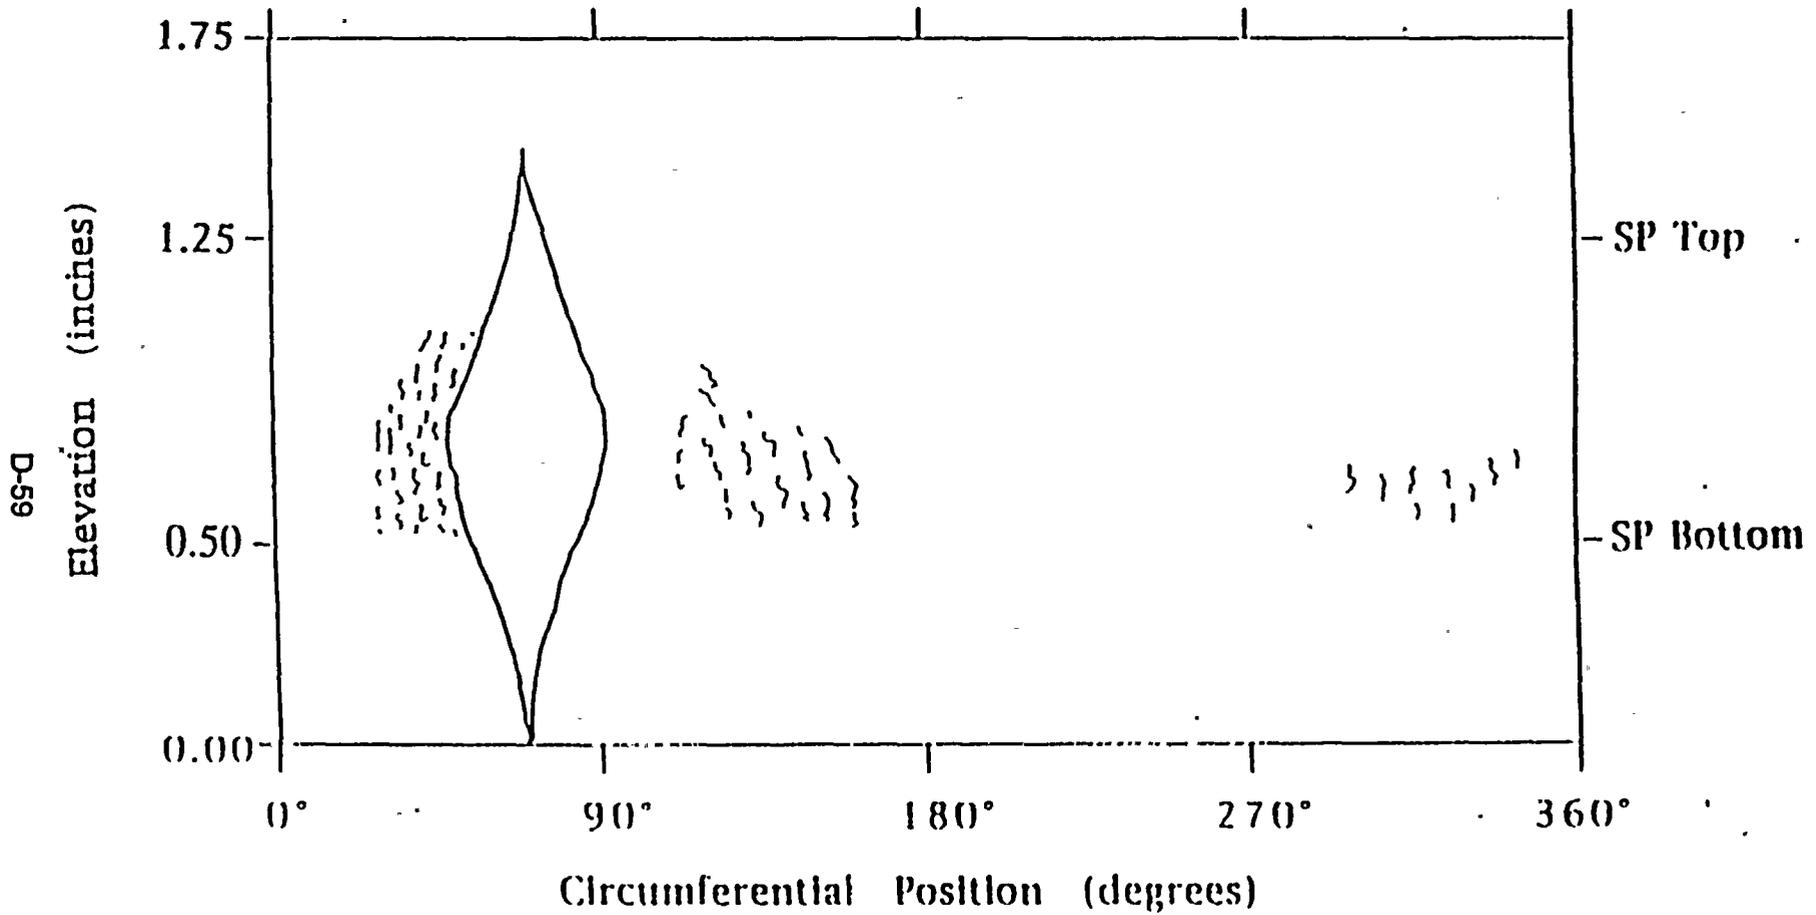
Sketch of the OD surface crack distribution found at the TSP2 region of Tube R21C43. Also shown is the location of the burst fracture opening, which had OD origin corrosion on its fracture face. The burst fracture opening extended beyond the TSP crevice region, but the corrosion cracking was confined to the crevice region. No ID corrosion was present.
